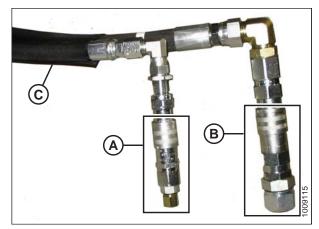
Auger Return and Reel Pressure Hose Bundle
